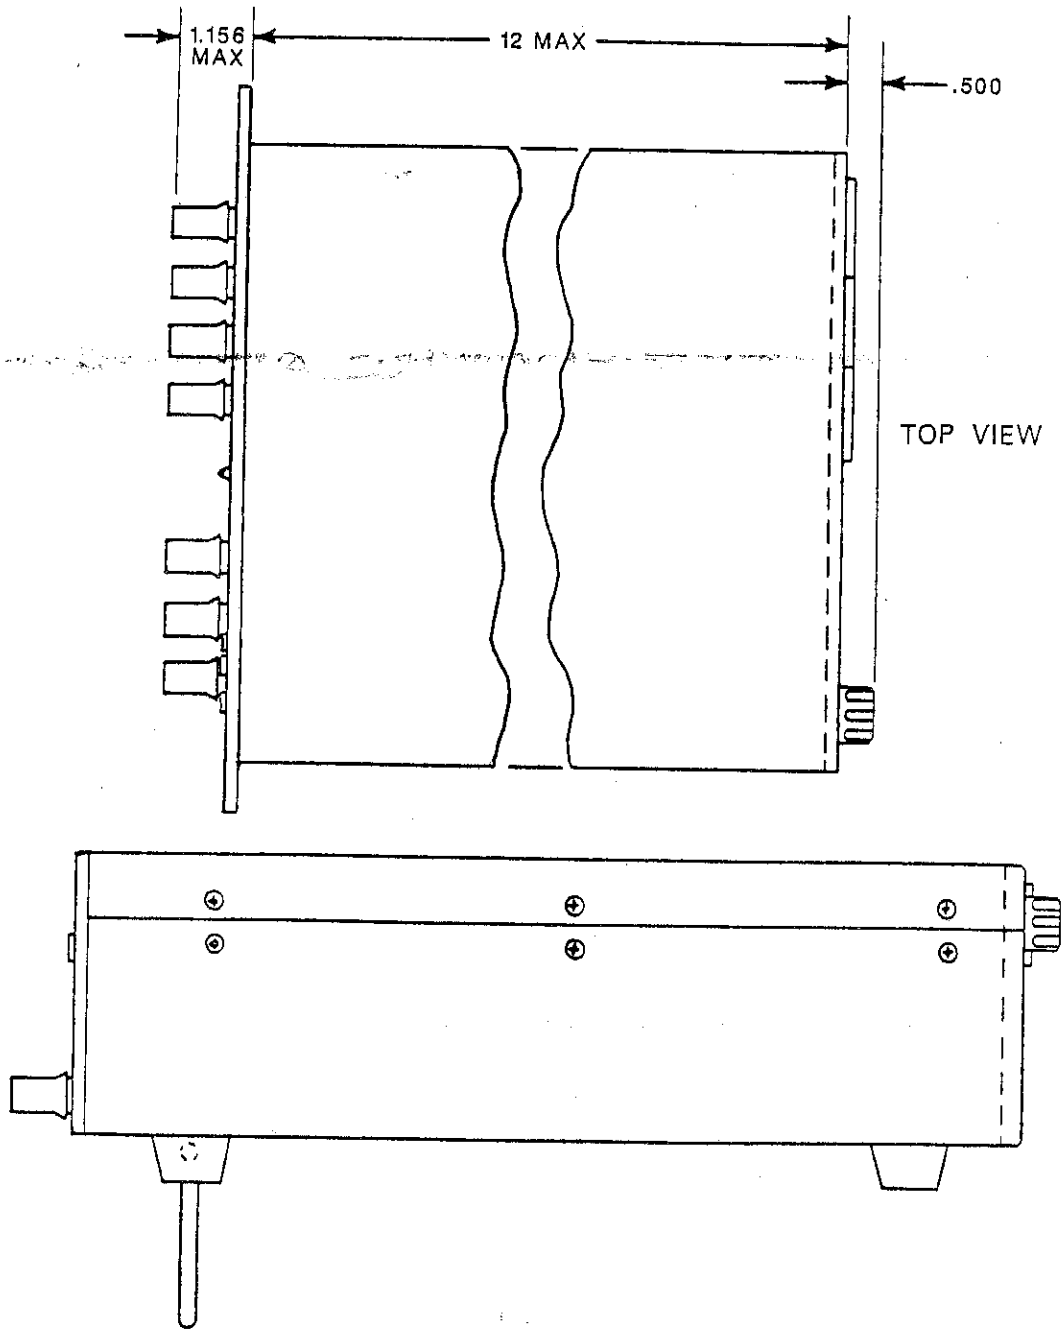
API Outline Drawing (Sheet 1 of 2)
